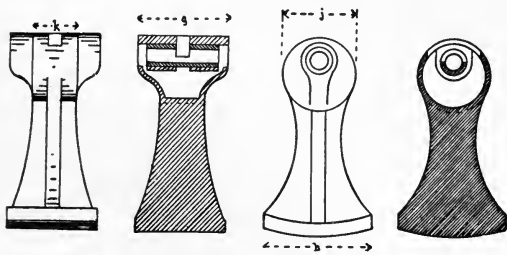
DETAILS OF JOURNAL BOX AND PEDESTAL.
